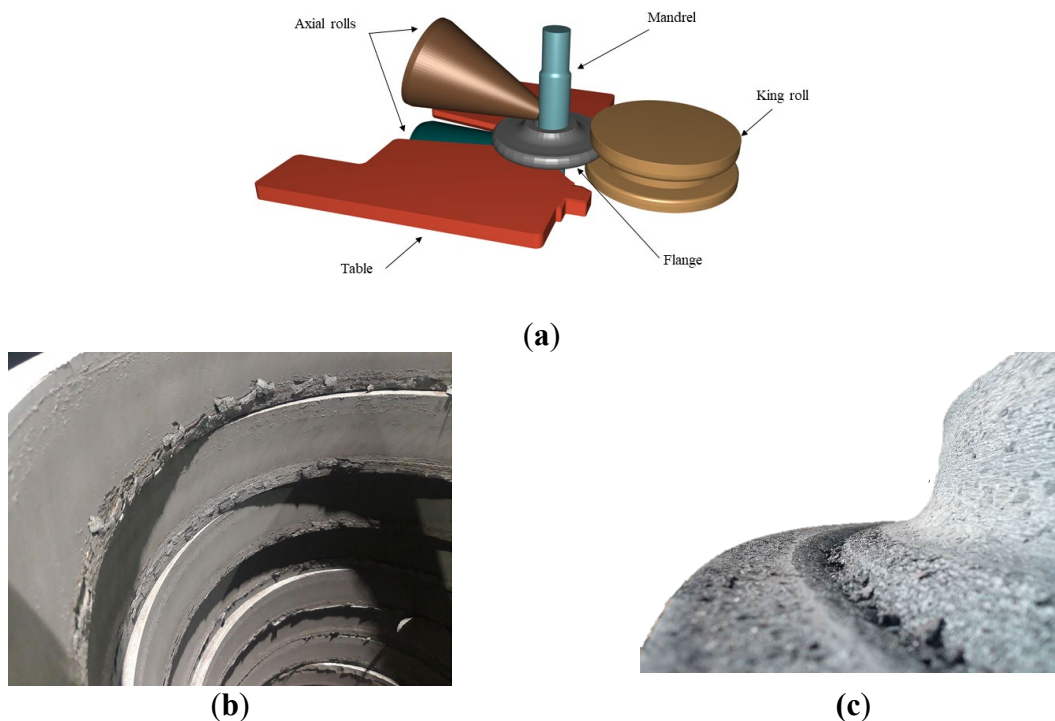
(a) Fe model of the RARR mill of ULMA Forging, (b) cracks identified in the ID of the neck and (c) example of fishtail defect.
